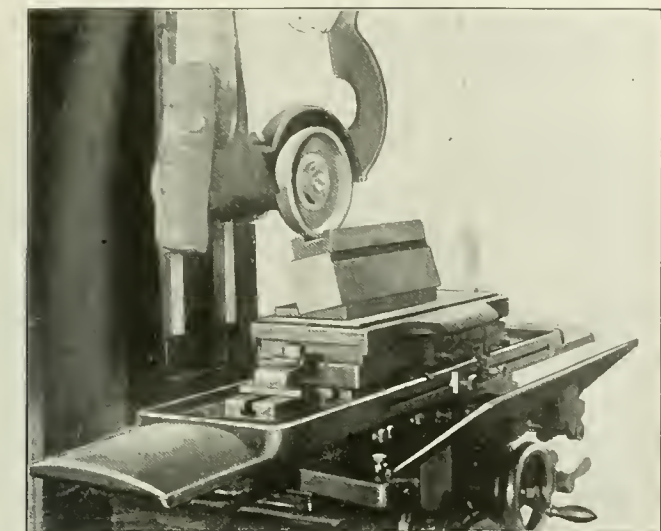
Grinding the Tapered Side of the Locking Bolt Blocks
